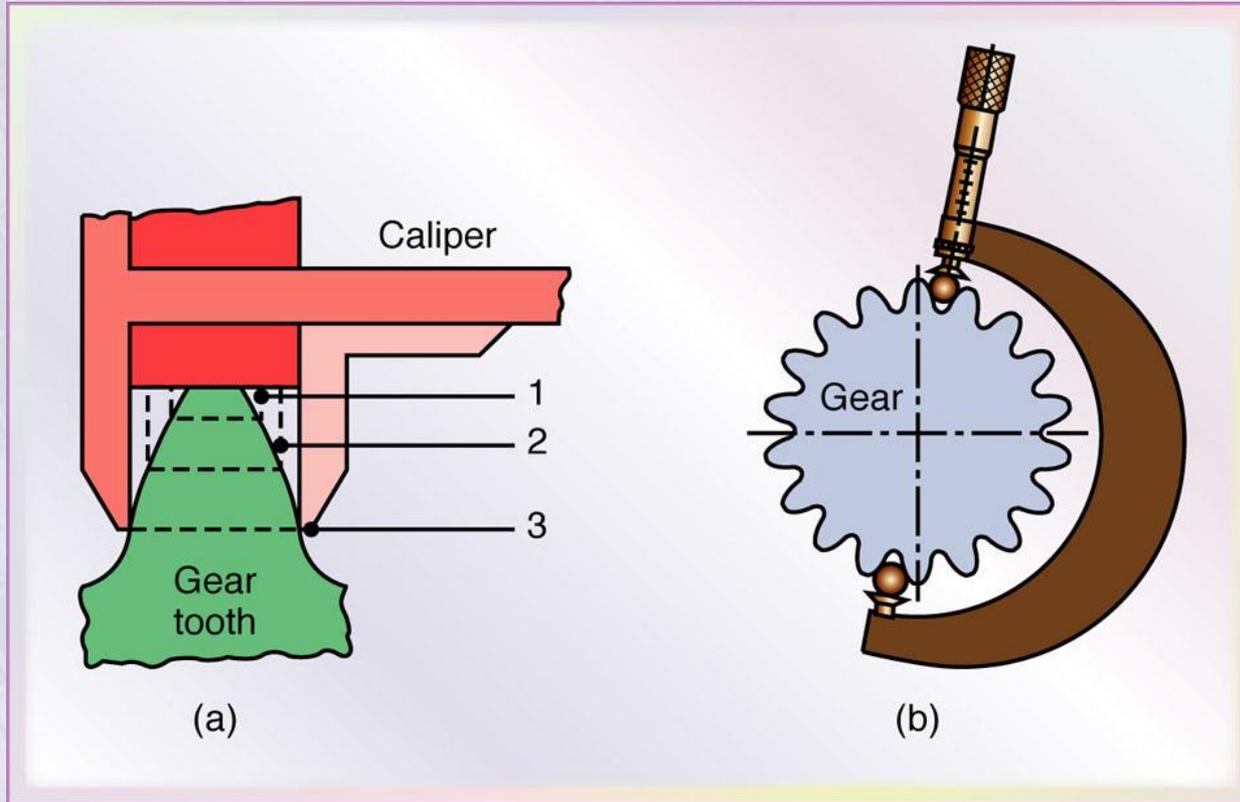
Measuring gear-tooth thickness and profile with (a) a gear-tooth caliper and (b) pins or balls and a micrometer. *Source:* Courtesy of American Gear Manufacturers Association.
